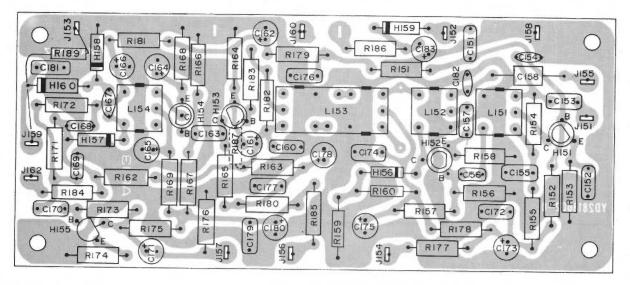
AM Tuner Unit Assembly P150 Component Locations
